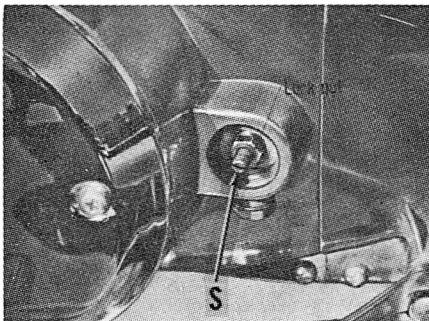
View of clutch adjustment screw for S32-2. Model T10 is similarly located on left side.
